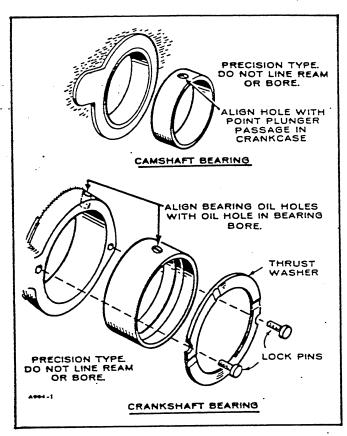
CAMSHAFT AND CRANKSHAFT BEARINGS
